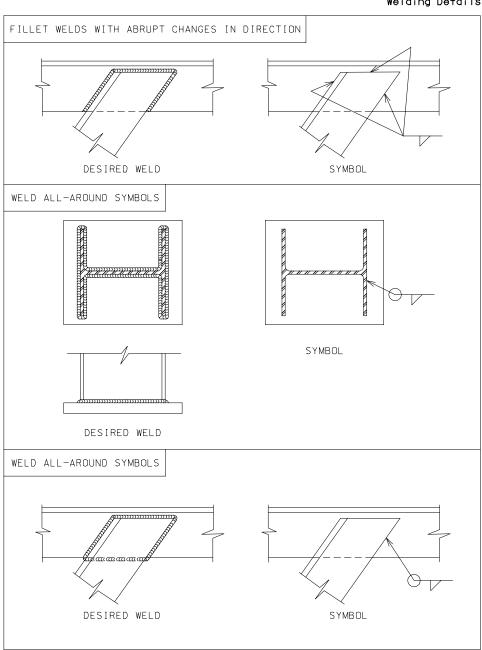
Application of Symbols - Fillet Welds
